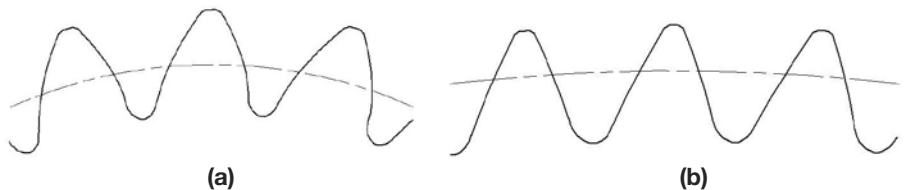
Asymmetric gear tooth profiles; (a)—24-tooth pinion, (b)—83-tooth gear.
